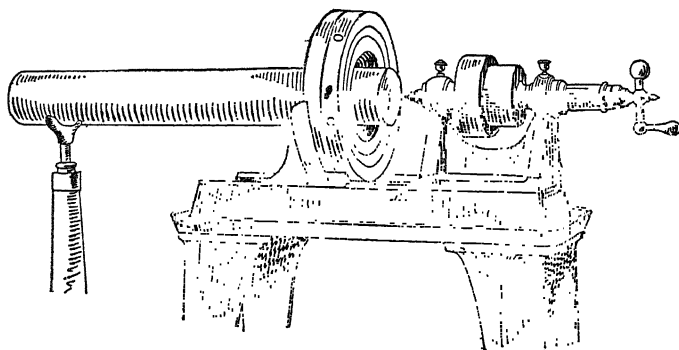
Centering machine. (Courtesy of D. E. Whiton.)
